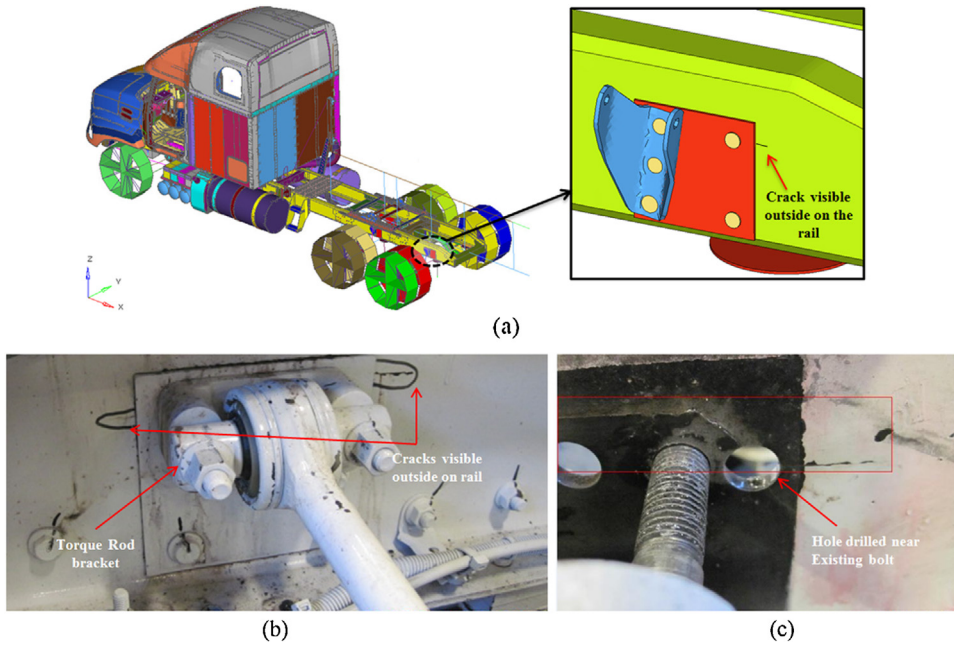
(a) Full vehicle layout and failure location. (b) Frame cracks visible near torque rod connection. (c) Crack path visible on frame behind outer reinforcement plate.
